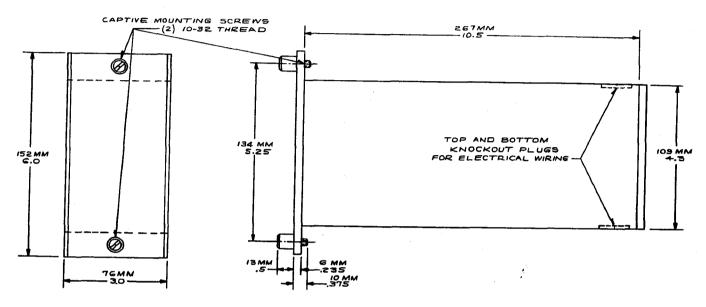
1. Mounting Dimensions, Panel Mounting Models
